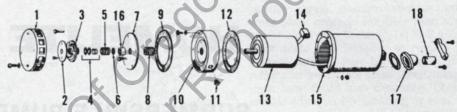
Exploded view of SP2 series submersible pumps.
